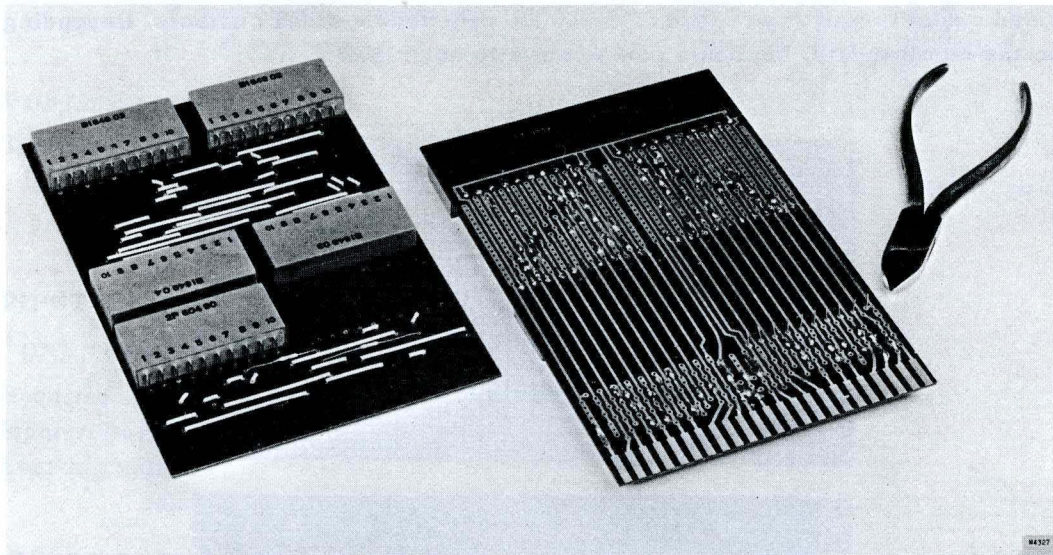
Circuit blocks mounted on the universal printed-wiring board.
